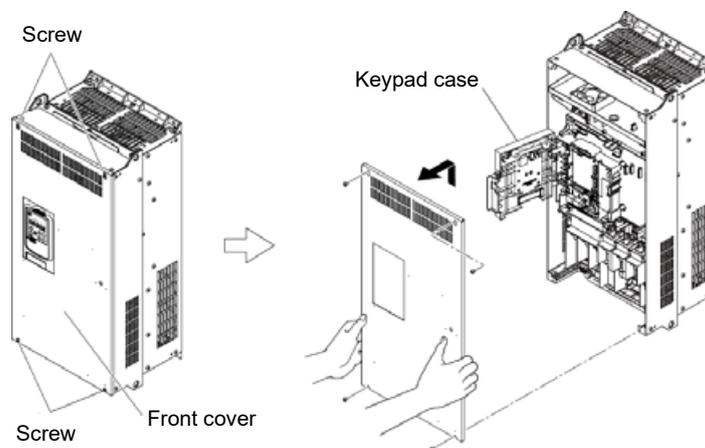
Removal of front cover and wiring guide (for FRN0059G2S-2G)
